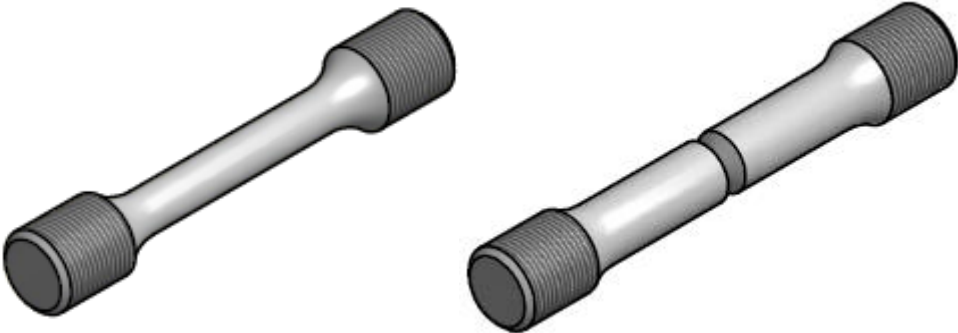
Drawing of a smooth tensile specimen and one of the notched round bar specimens.
